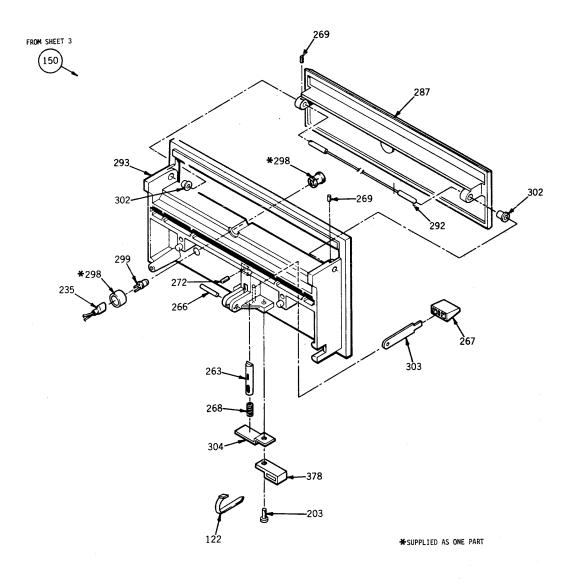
FRONT PANEL ASSEMBLY (SHEET 1 OF 2)
